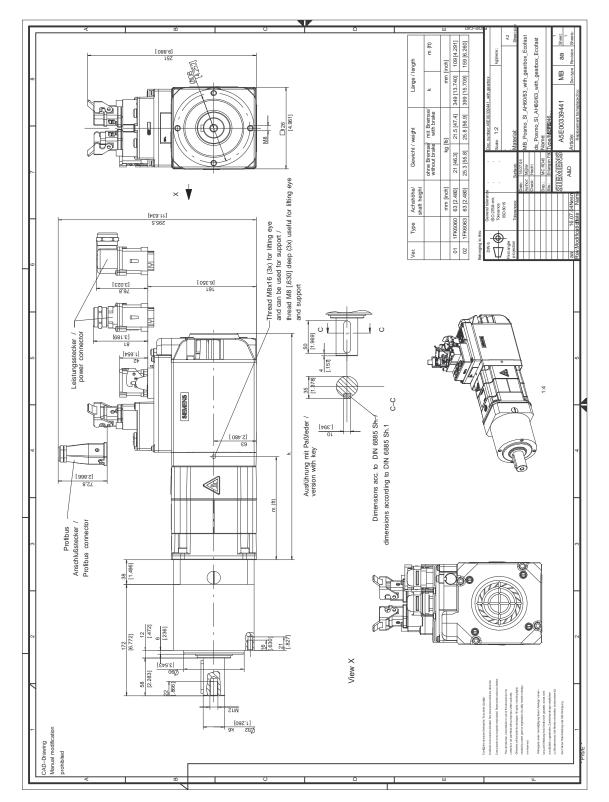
Dimension drawing POSMO SI 6SN246 –2CF 0–16 0 with gearbox LP120–M01
